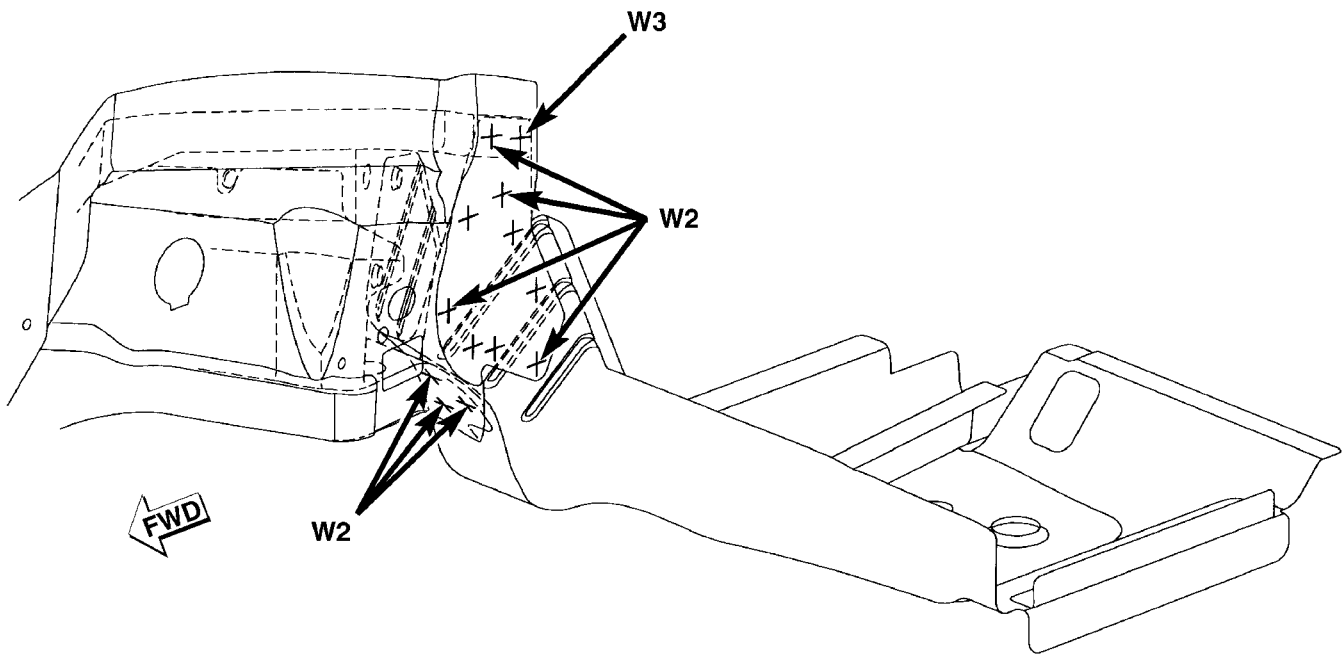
FRONT SUSPENSION STRUT TOWER, FENDER SIDE SHIELD, SIDE RAIL AND REINFORCEMENTS
